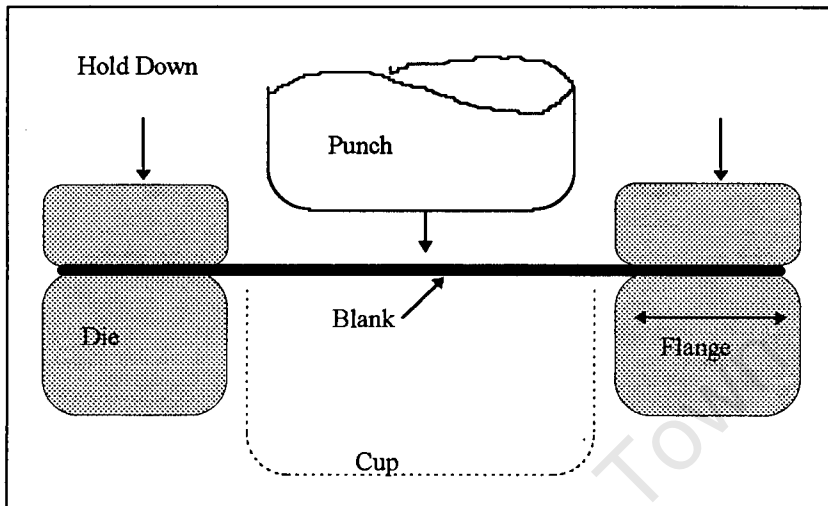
Tool and Blank Set-up for Deep Drawing Operation
